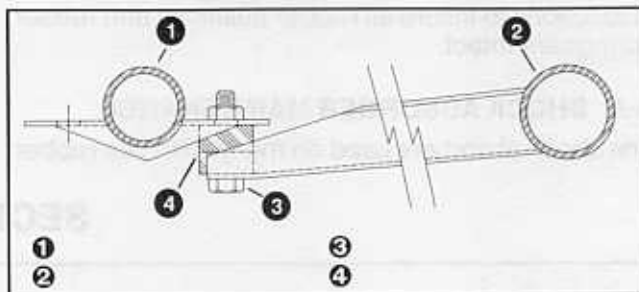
Center Torque Arm Attachment to Cross-Shaft Assembly
